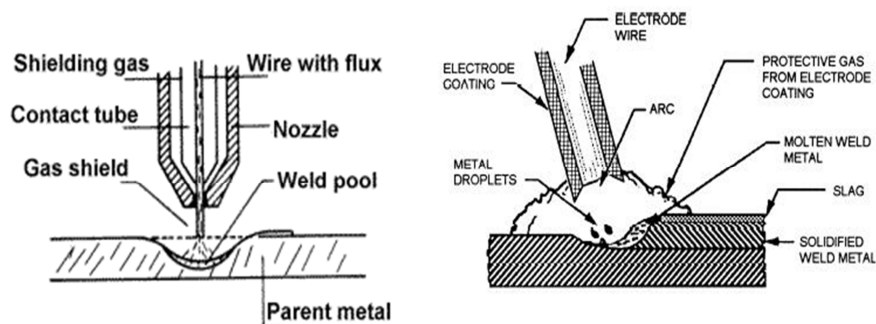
On the left: FCAW welding technique; On the right: SMAW welding technique
